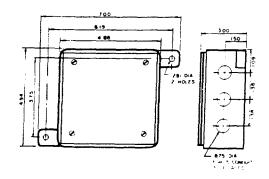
Controller Outline - Cast Aluminum Enclosure
